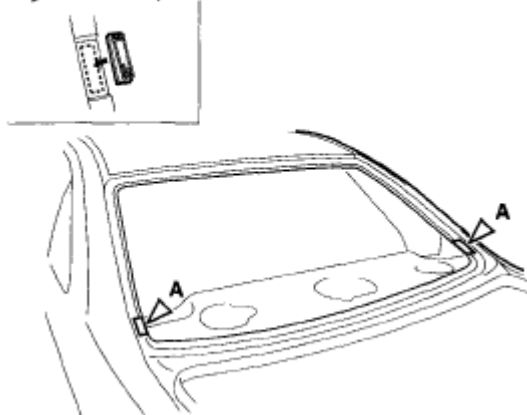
Attaching Fasteners With Adhesive Tape To Rear Window Opening Flange
